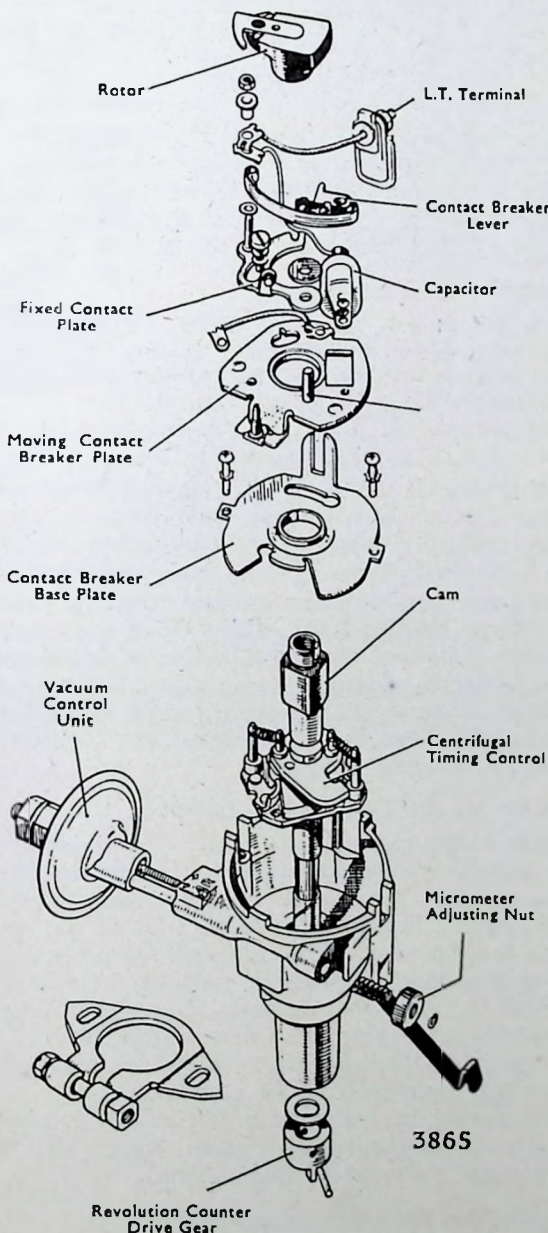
Exploded view of the distributor (DM2/P4-S94).
